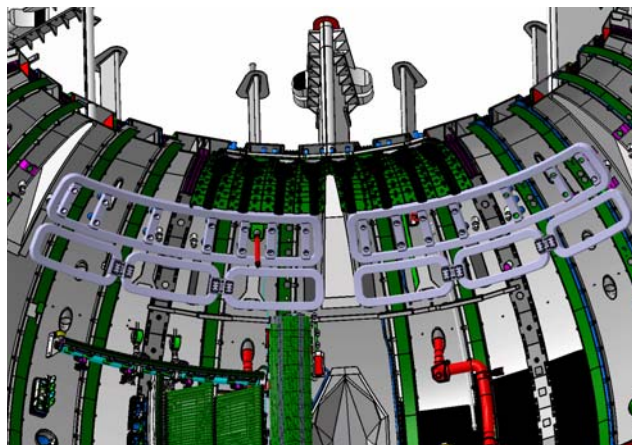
Mechanical layout of ELM coils inside the JET vacuum vessel.
